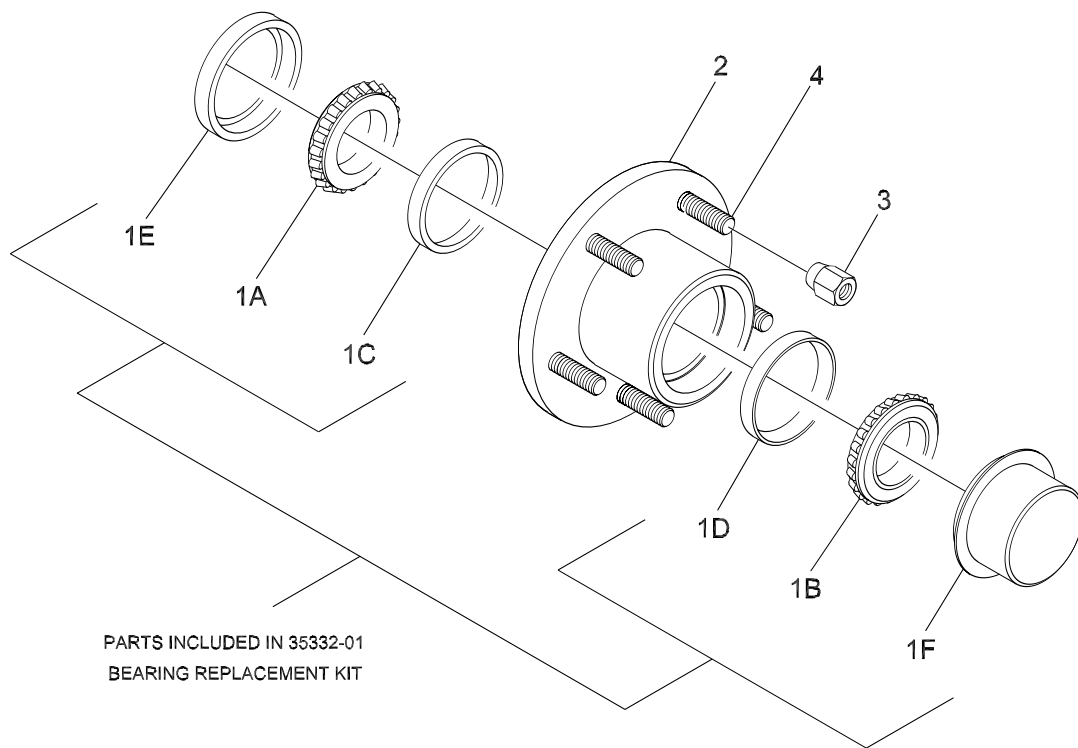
HUB ASSEMBLY, 5 BOLT
